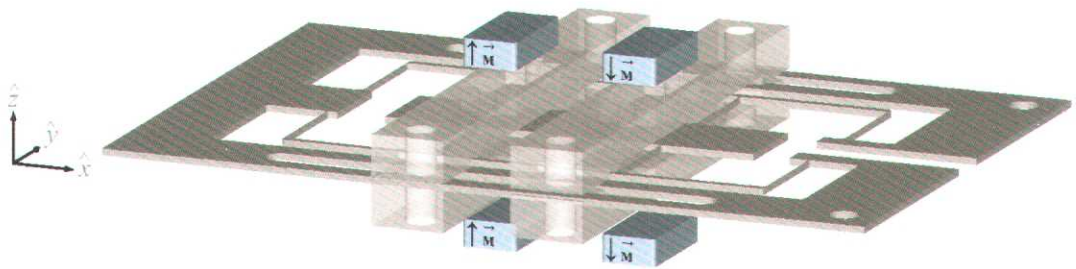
Exploded View of Magnet Pairs (and magnetization) in Device
